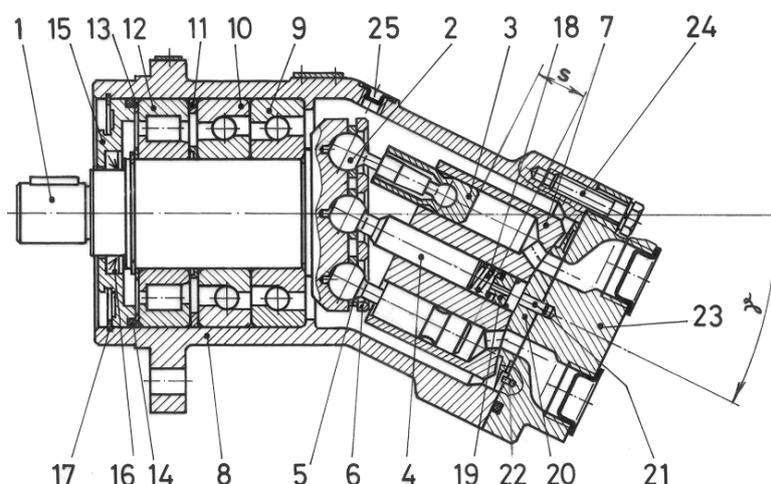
Hydrostatic unit with axial pistons, without adjustment – longitudinal section:
